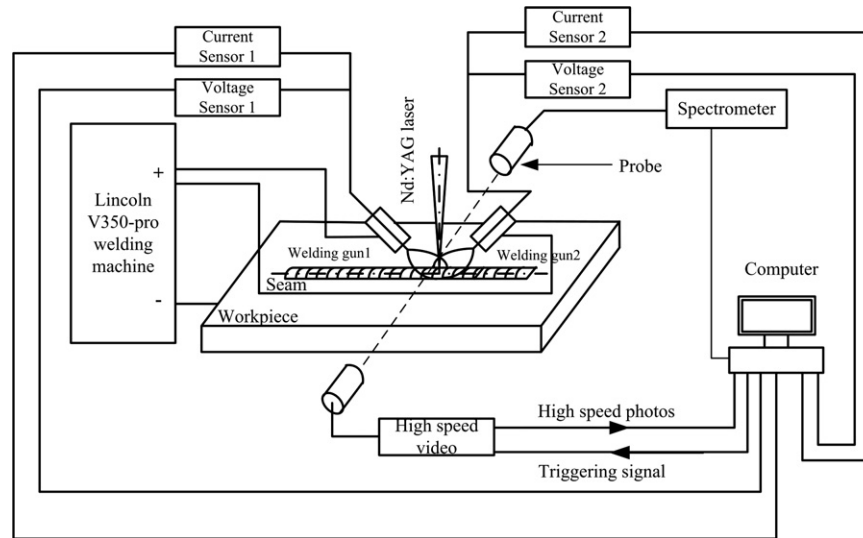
Schematic of laser-twin-arc hybrid welding system.
